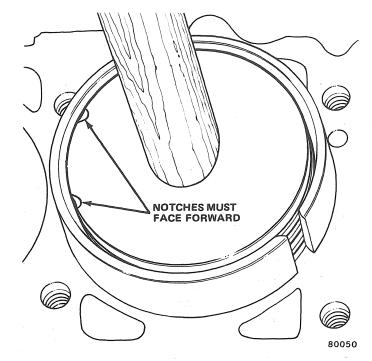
B-137 Installing Piston Assembly into Cylinder Bore
